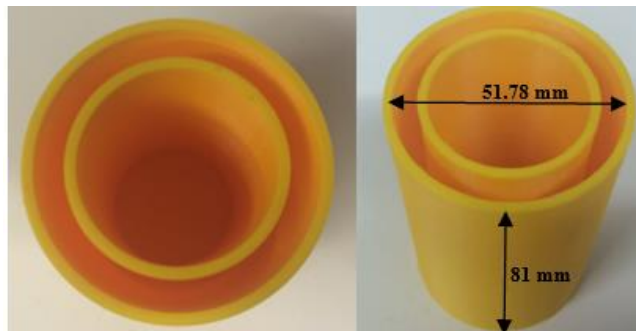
3-D printed cylindrical calcaneus bone structure (a) Top View (b) Side View.
